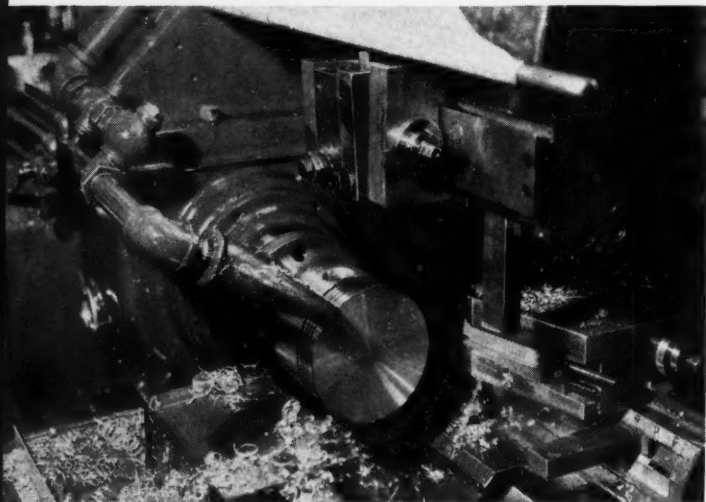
The piston is turned, faced, chamfered, and grooved in a single operation in this machine.
